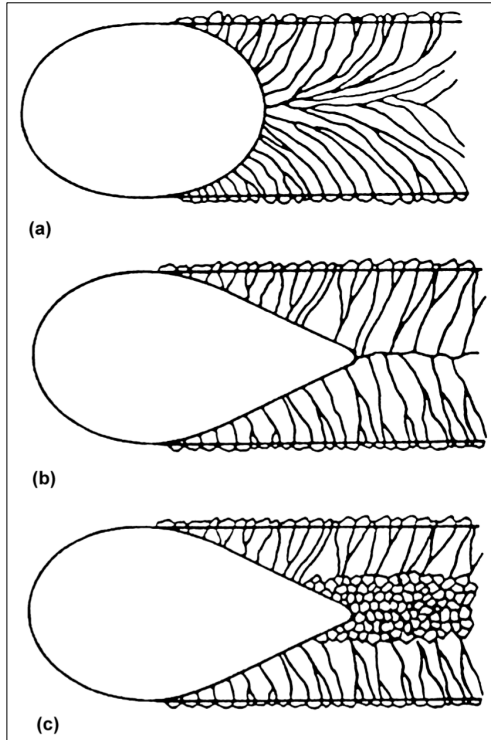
Schematic figure of Different types of grains structure and weld pool shape in fusion weld. (a) elliptical weld pool shape with axial structure at low welding speed (b) tear-drop shaped weld pool with centreline structure at high welding speed (c) tear-drop shaped weld pool with equiaxed structure at higher welding speed [10].
